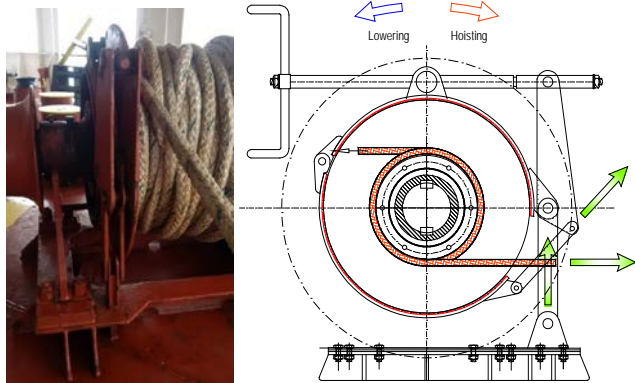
Left: Line being incorrectly reeled onto an undivided drum considering the brake mechanical linkages set-up. Right: Drawing showing how the mooring line should be reeled so that it pays out from the bottom of the drum not from the top.
